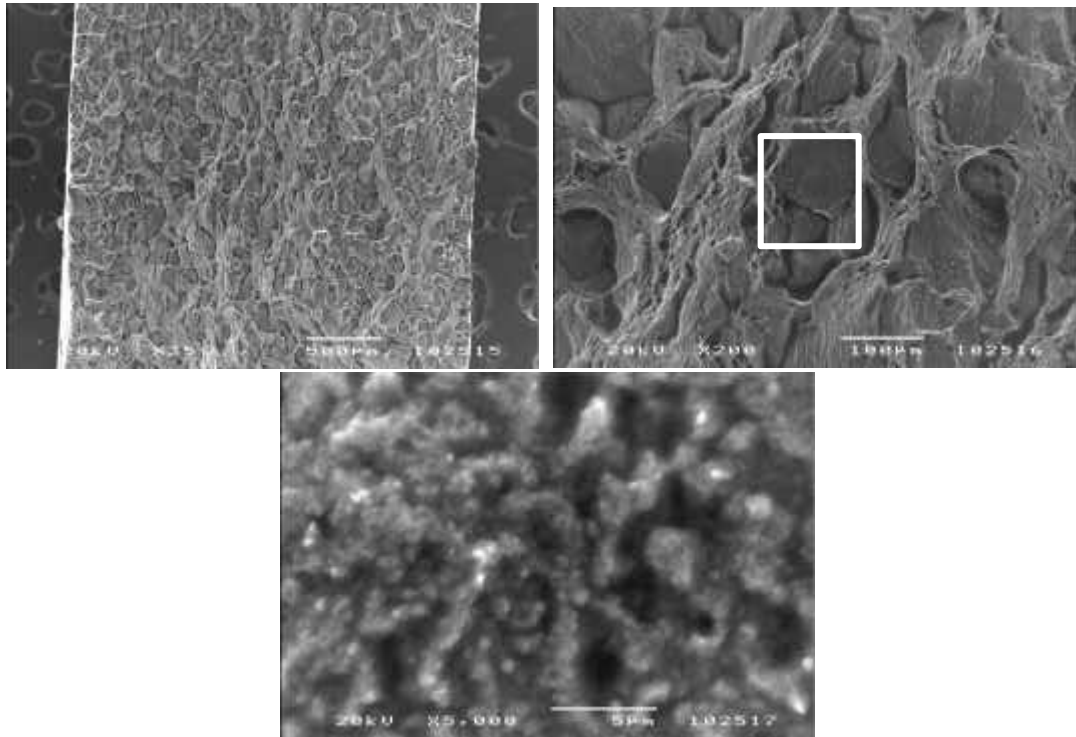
Fracture surfaces of 20%(2.4t) CW-316LN-P0 specimen
